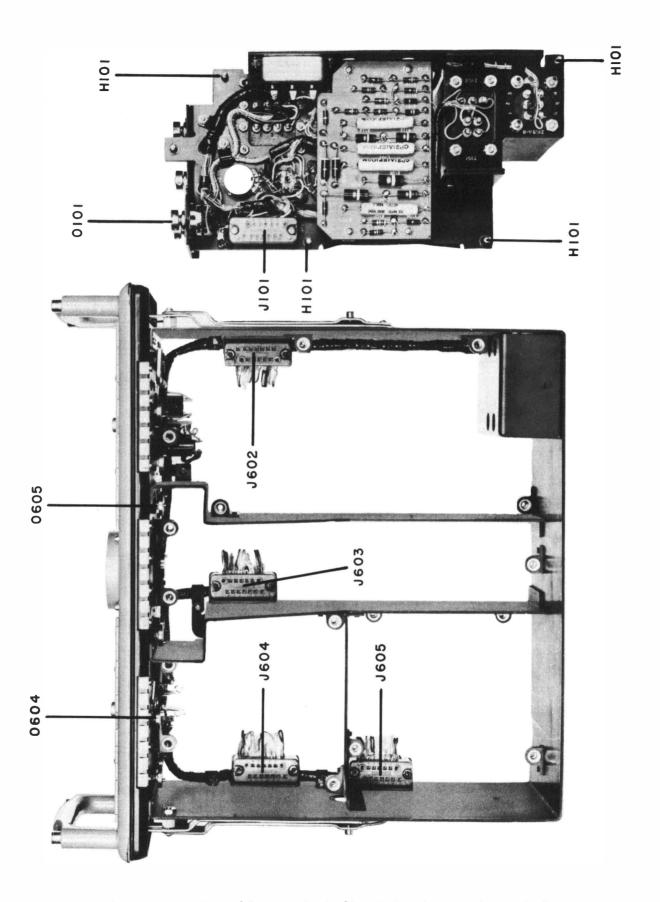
View of Receptacles in Chassis-Panel Assembly (Typical)
